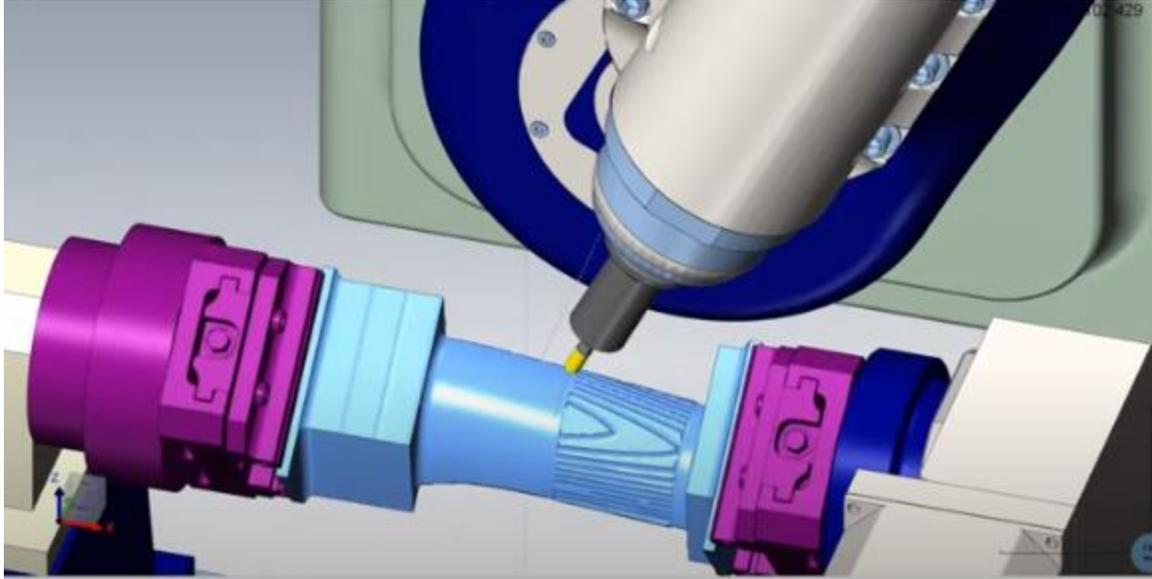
The machining procedures of the sample turbine blade utilizing the 5-axis CNC milling.
